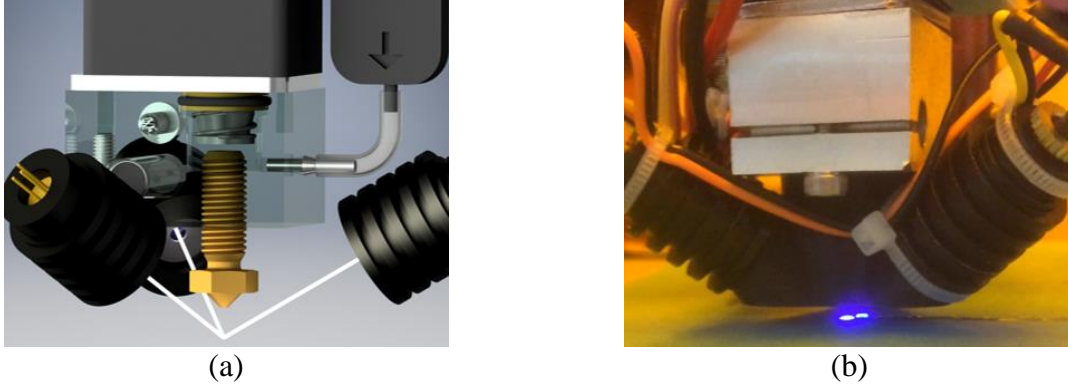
Final print head design: (a) CAD model and (b) fabricated prototype
